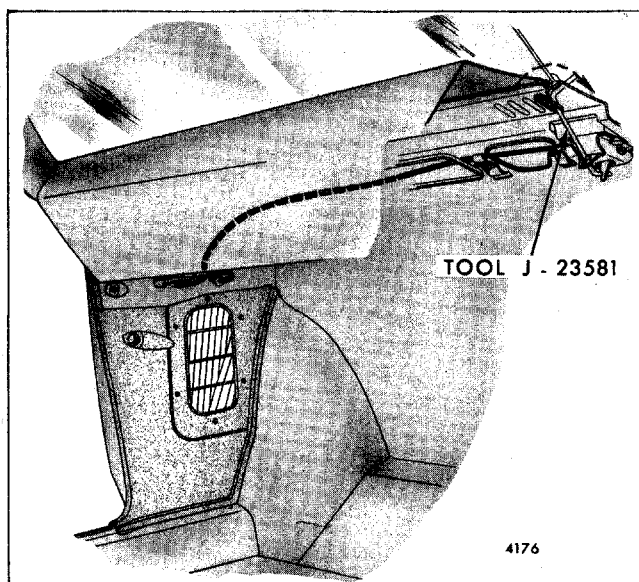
Hood Latch Auxiliary Release Tool - "H" Body
